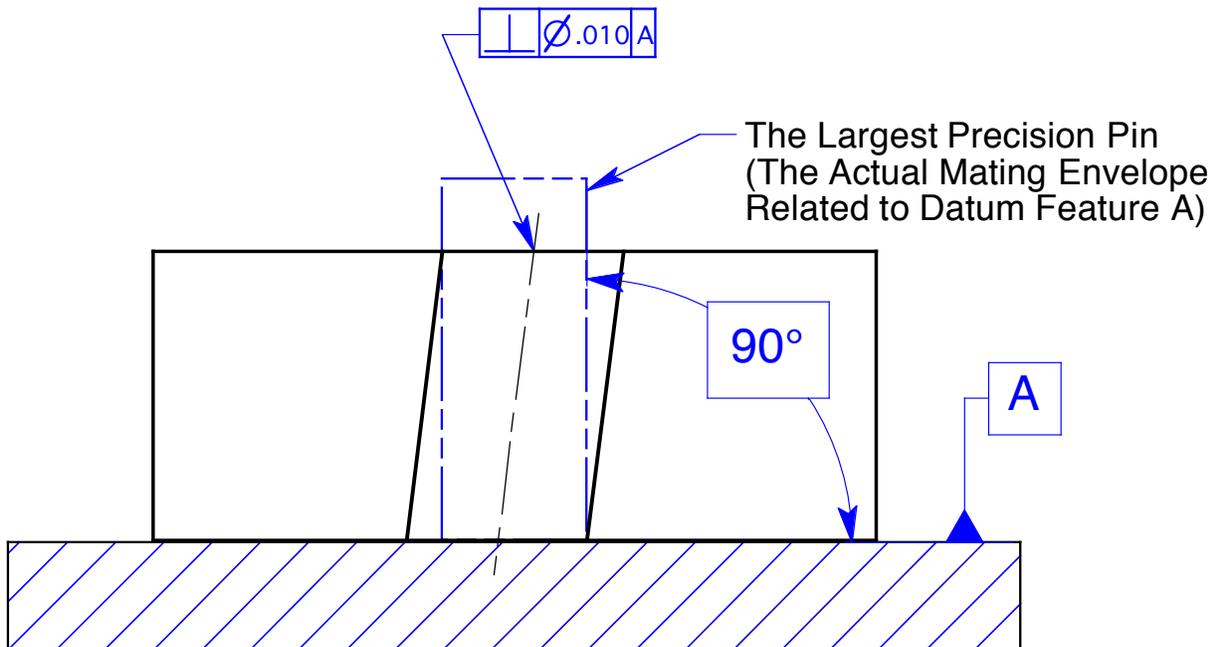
The actual related mating envelope is the largest precision pin, perpendicular to datum plane A that will fit inside the hole.
